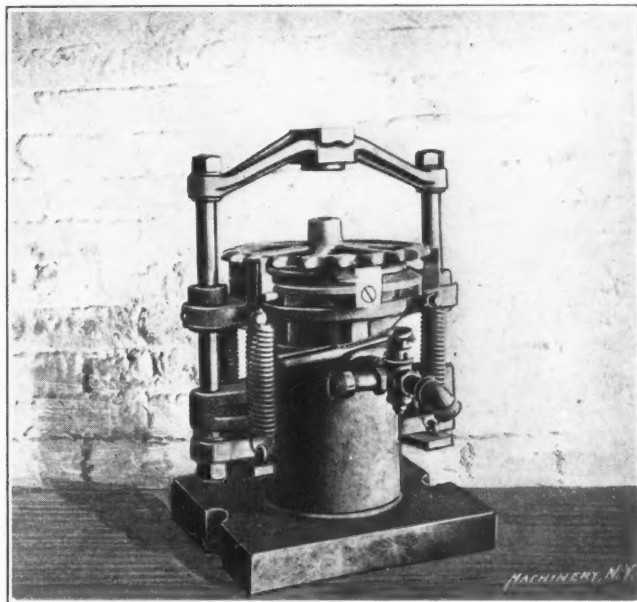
Pneumatic Clamping Jig for Sprocket Wheel.
